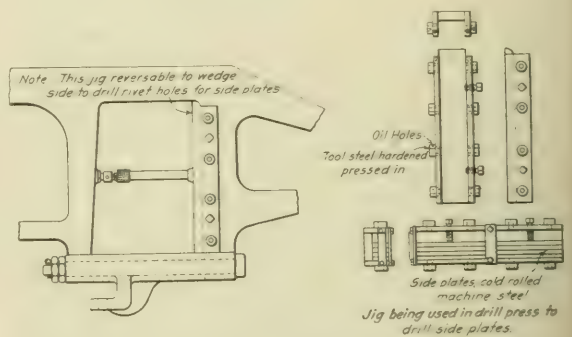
Jig for Drilling Side Plates and Frame Jaws.
